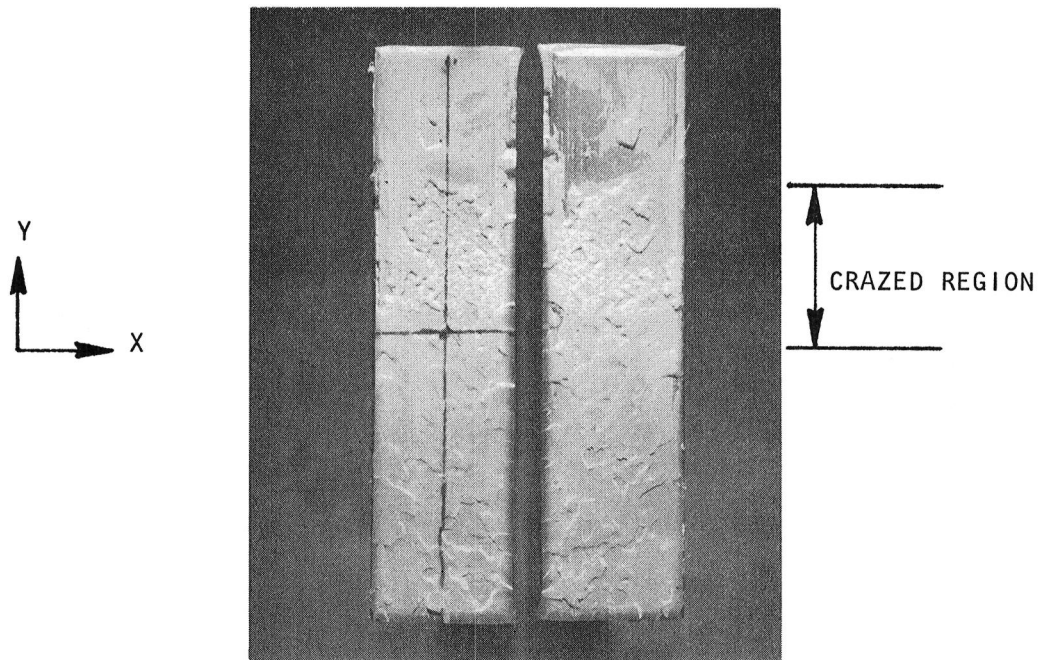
FRACTURE SURFACE OF SPECIMEN AB-22
